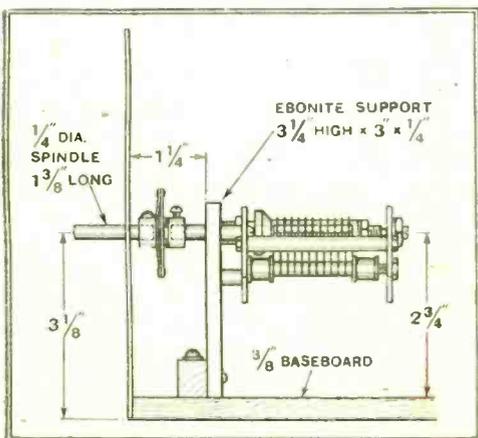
Constructional details for mounting the main tuning condenser  $C_1$ .
